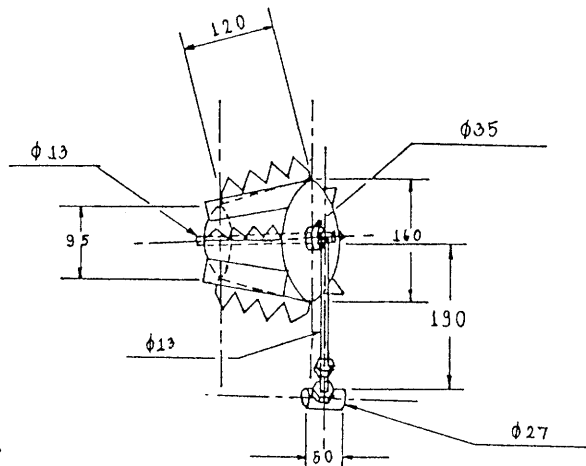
Taper type roller (scale 1 : 10, dimensions in millimeters)
